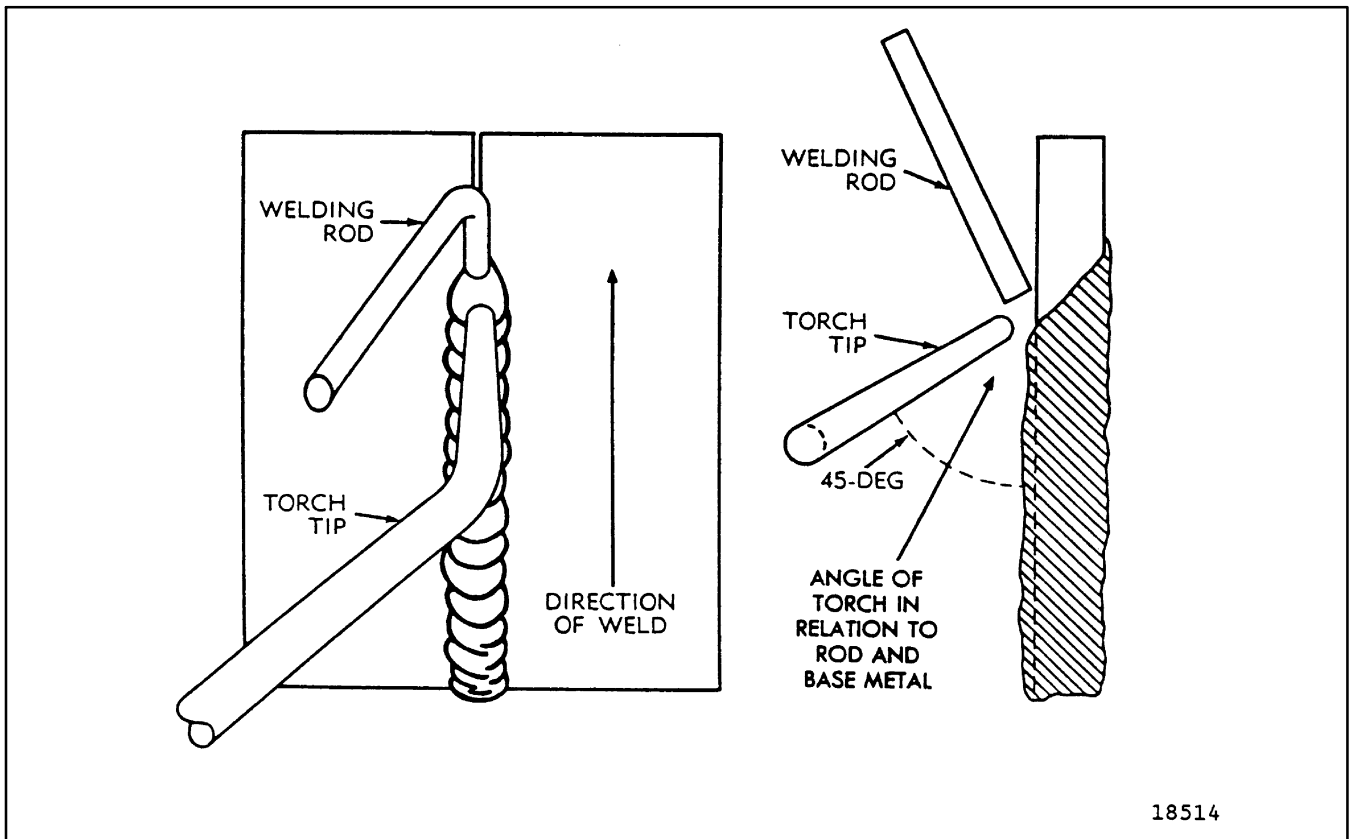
Welding a Butt Joint in the Vertical Position
